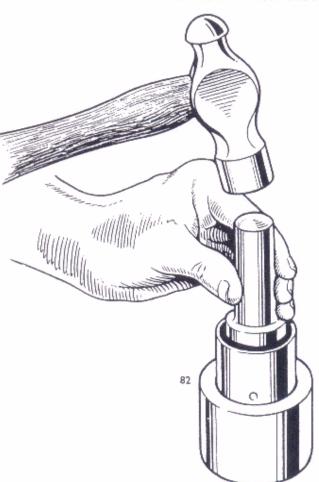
Removing the oil seal from the dust excluder sleeve assembly using service tool Z137
